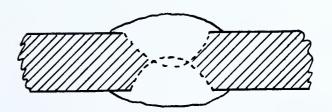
Appearance of Welded Seam Before Chipping
